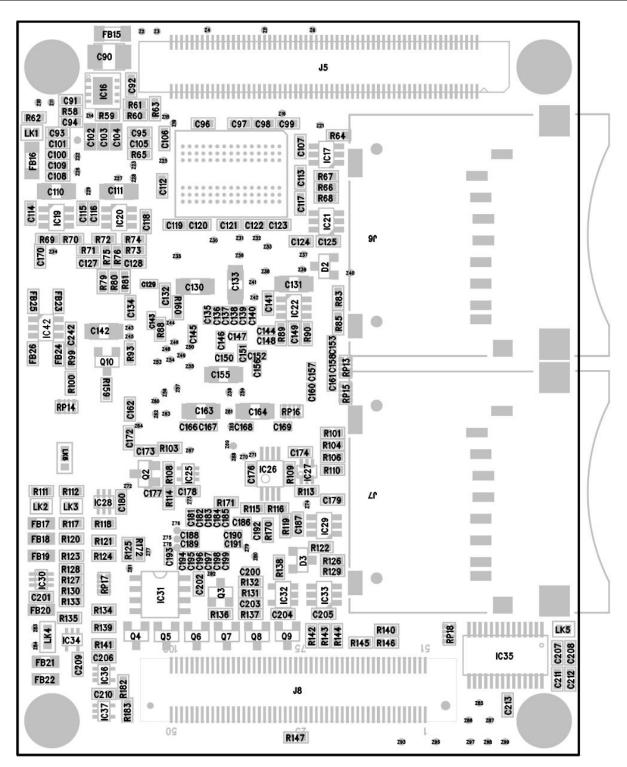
RED320 COMPONENT PLACEMENT DIAGRAM – BOTTOM SIDE
